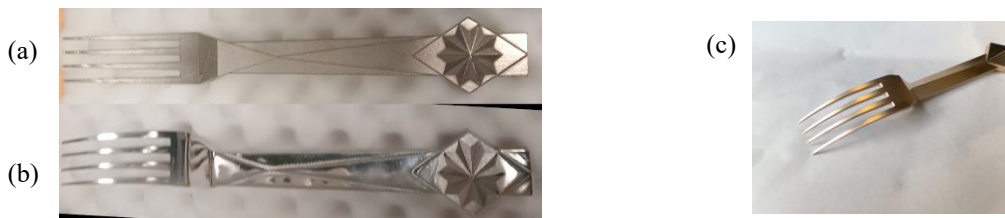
After machining post-processing (a); the fork underwent electropolishing (b); final component machined in CNC (c)
